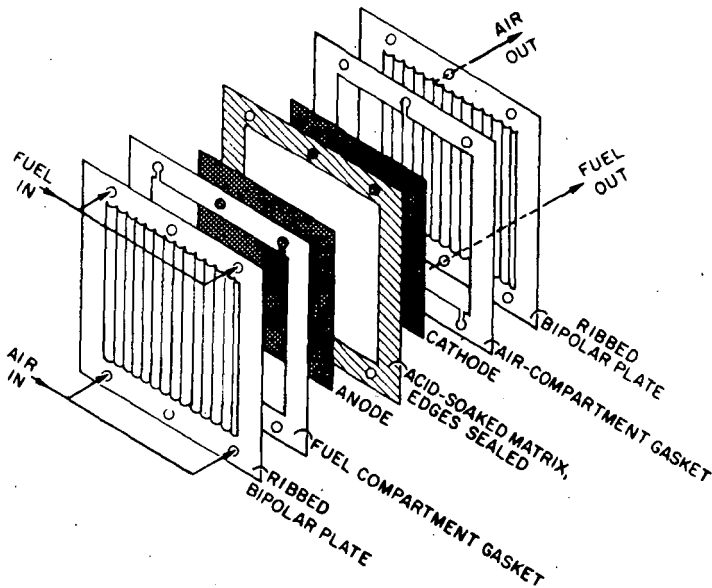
EXPLODED VIEW OF A SINGLE CELL
